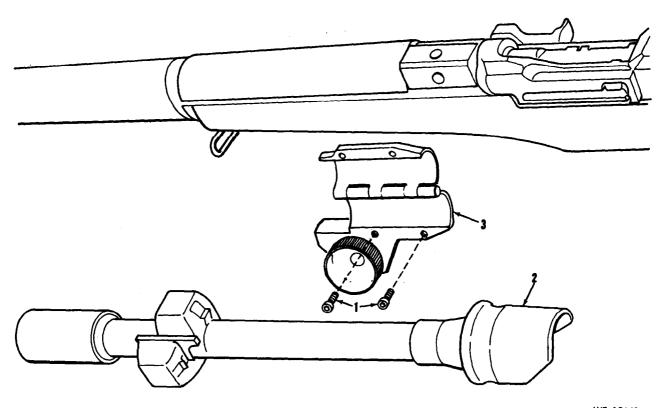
Telescope mount assembly for rifle M1C (Sniper's) - exploded view.
